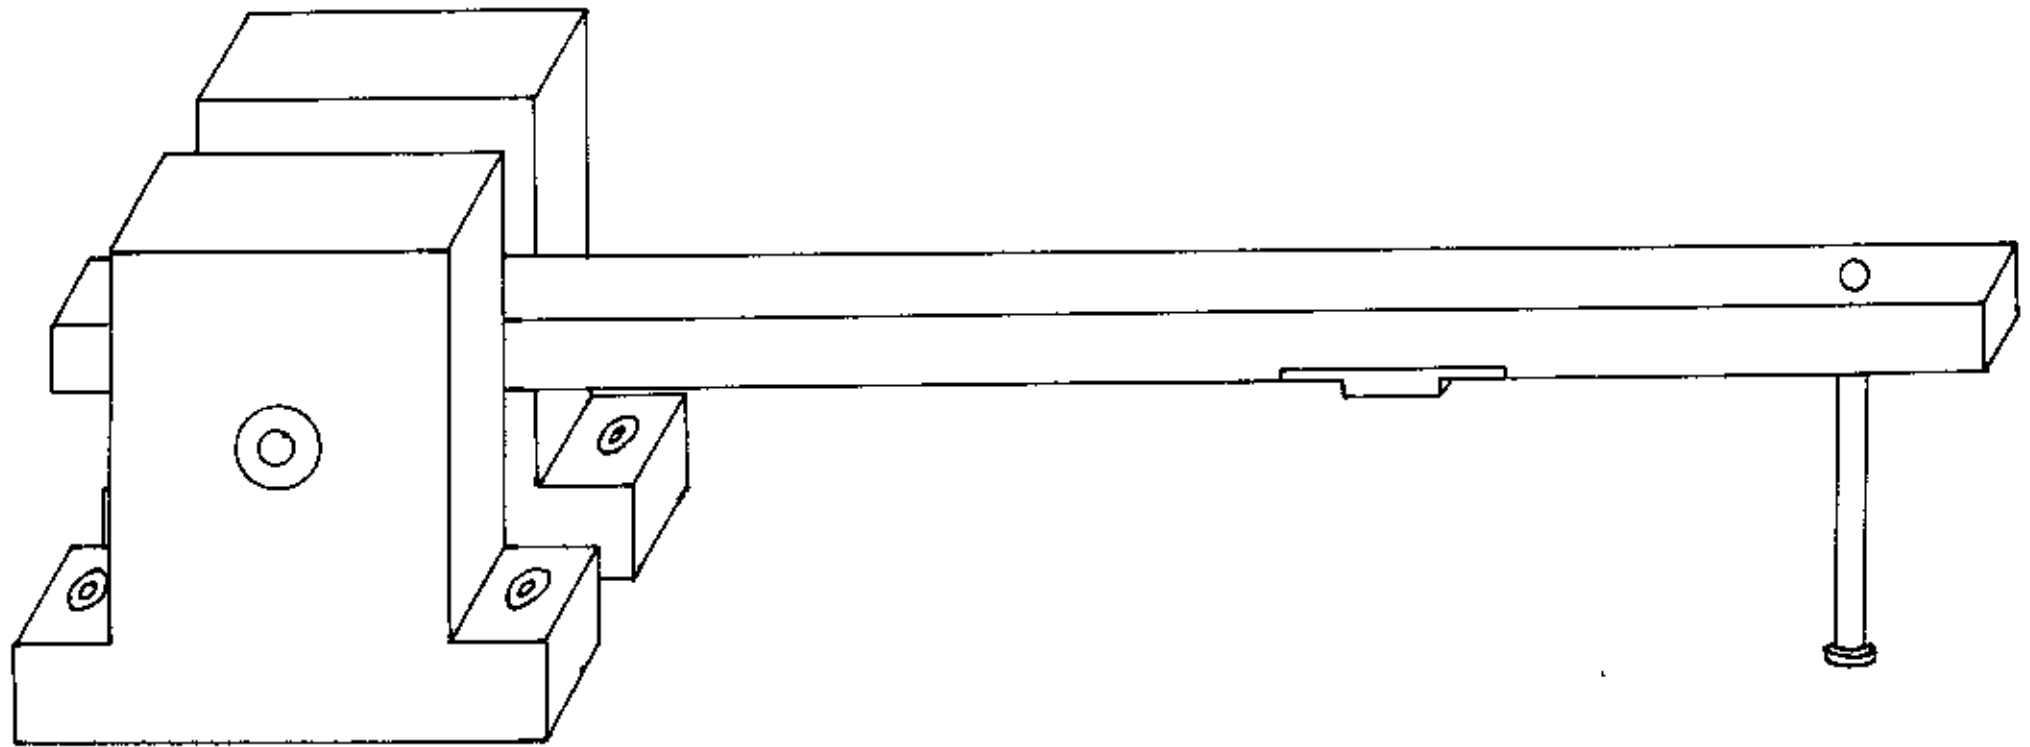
A schematic diagram of assembling of the load arm, specimen holder and rod with bearing house
